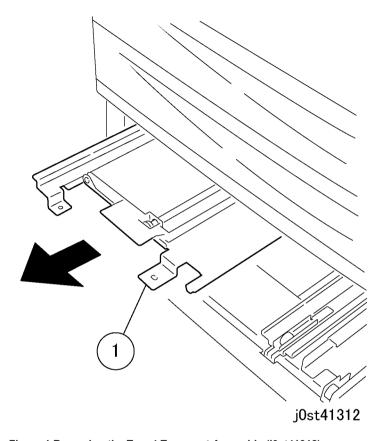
Removing the Tray 4 Transport Assembly (j0st41312)
